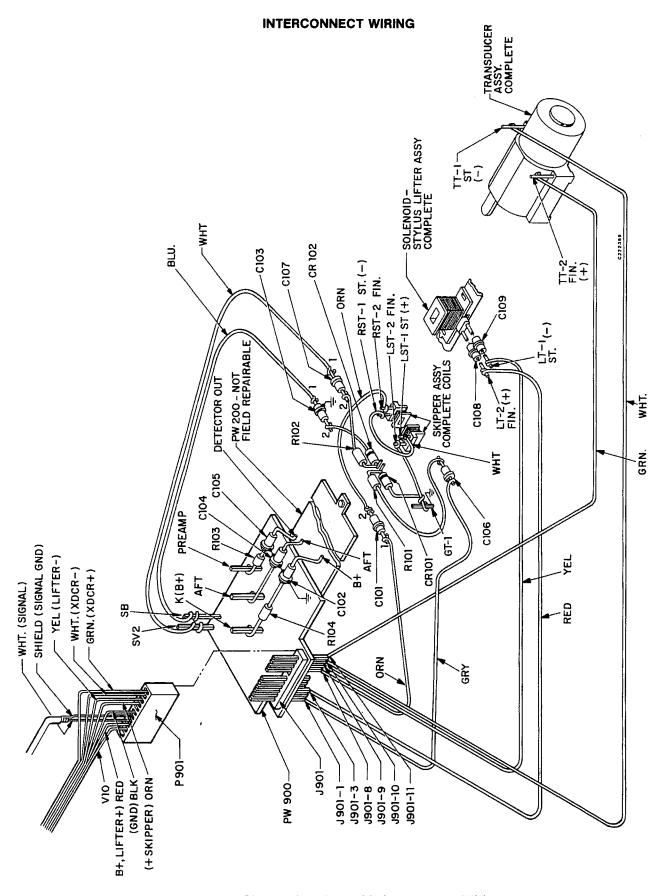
Pick-up Arm Assembly Interconnect Wiring
